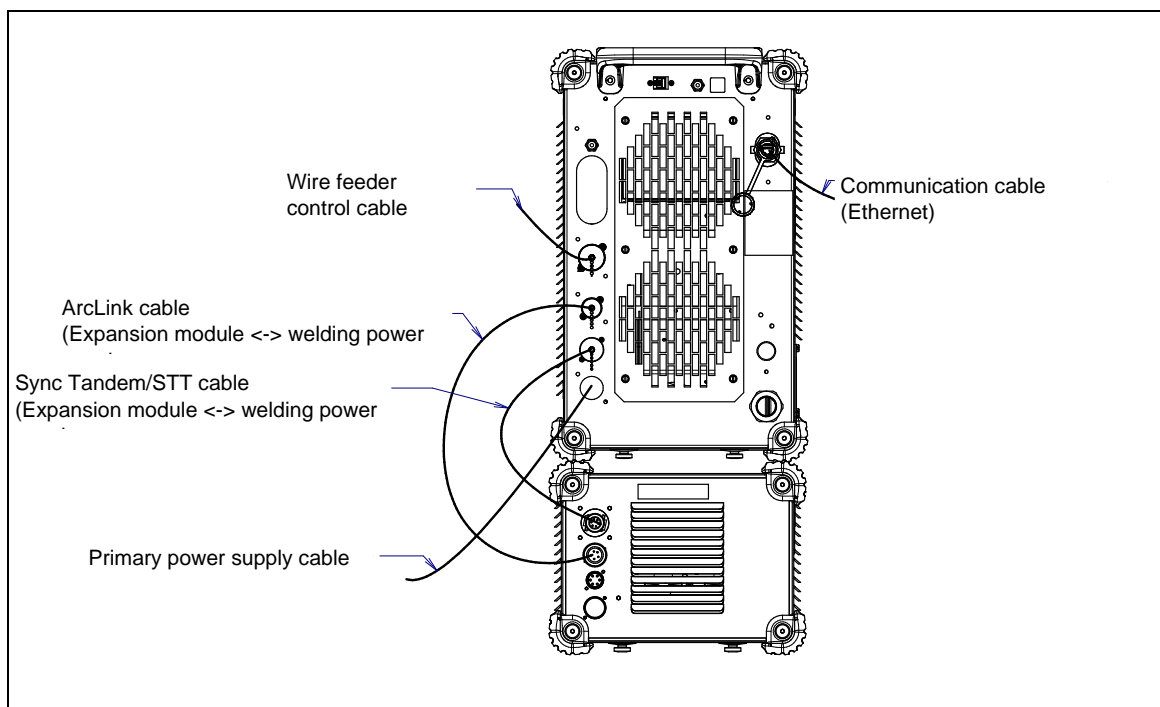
(f) Connection of welding power supply Power Wave R350 and STT module (2/4)
